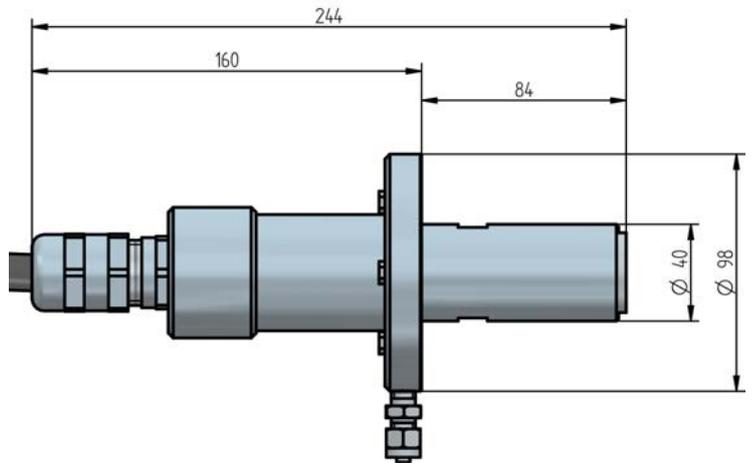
Dimensional drawing Combination Probe KS1D-Ex (type ZFP2)
